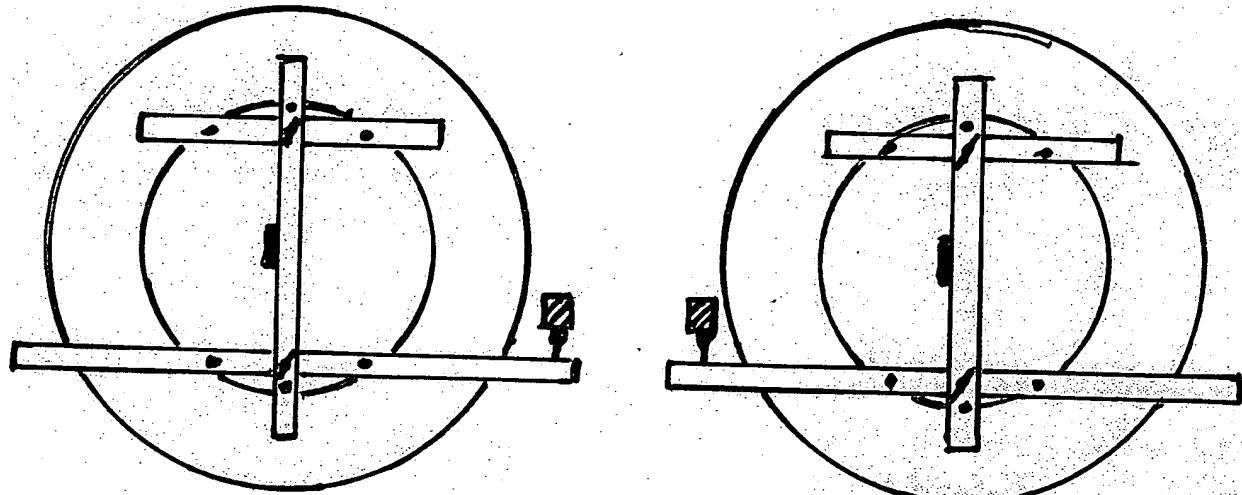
CHECKING ANGLE ON AXLE SPRING PAD
